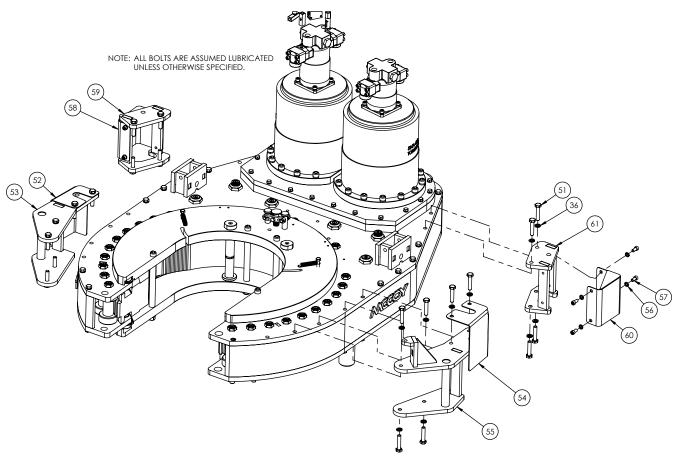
CLE22000XHT-14 External Tong Assembly 07
